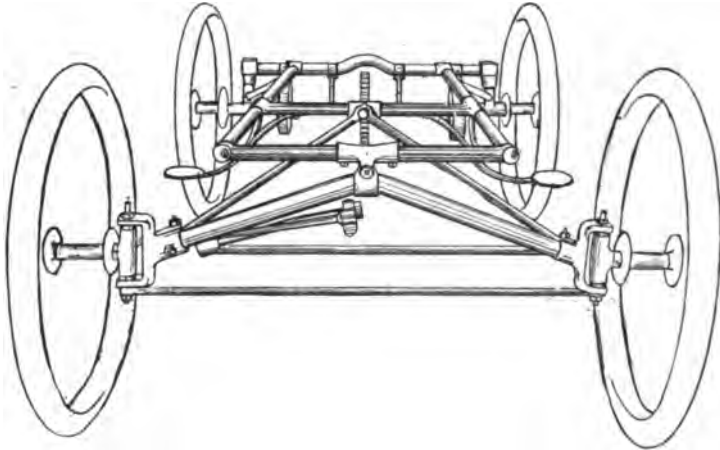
The Tubular Flexible Underframe of the McKay Carriage, showing the double swivel jointed front axle.
